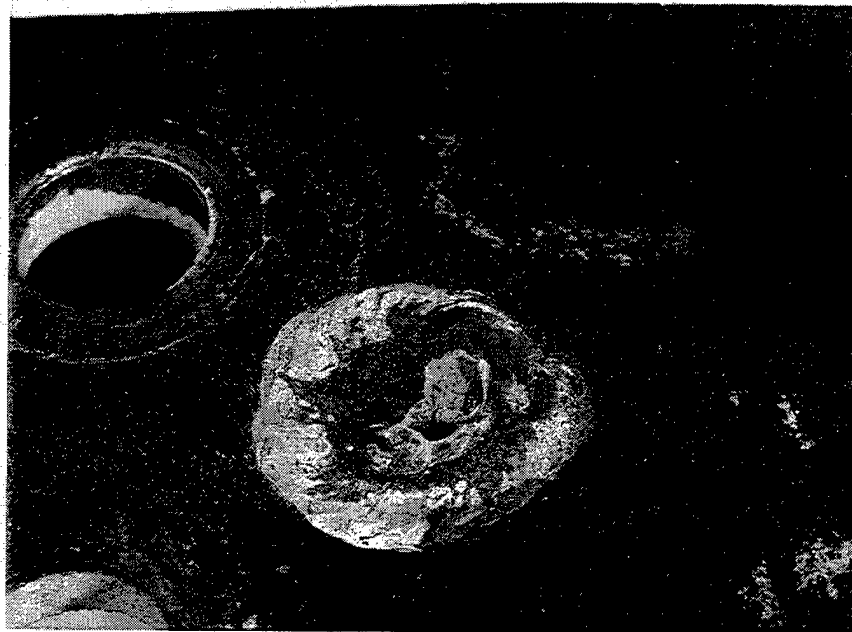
Enlarged view of the weld fracture in the tie-down base plate where the welded end of the bar broke loose.
